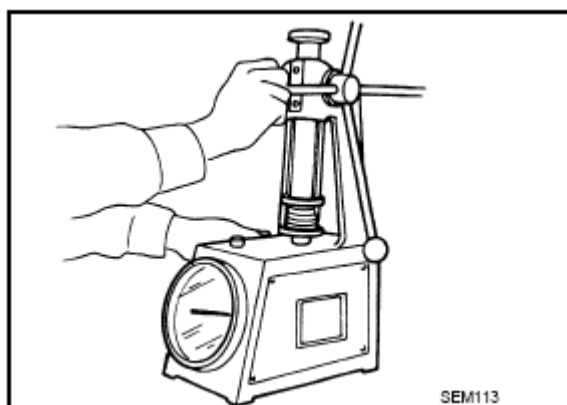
Checking Valve Spring Pressure At Specified Spring Height
